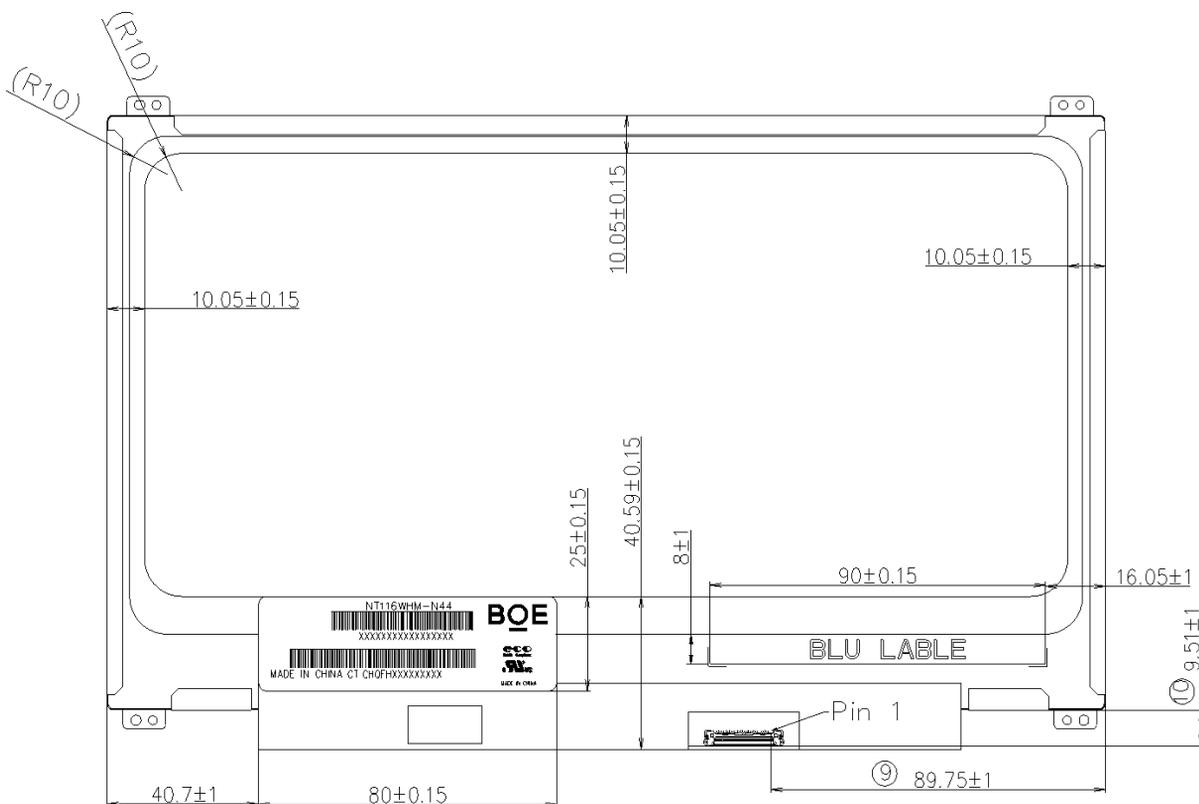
TFT-LCD Module Outline Dimensions (Rear view)
